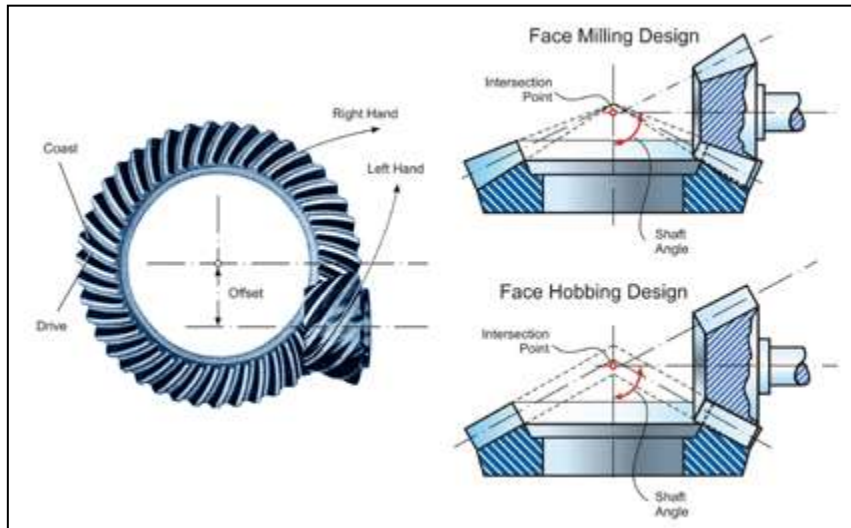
Face milling and face hobbing (Stadtfeld, 2011)
